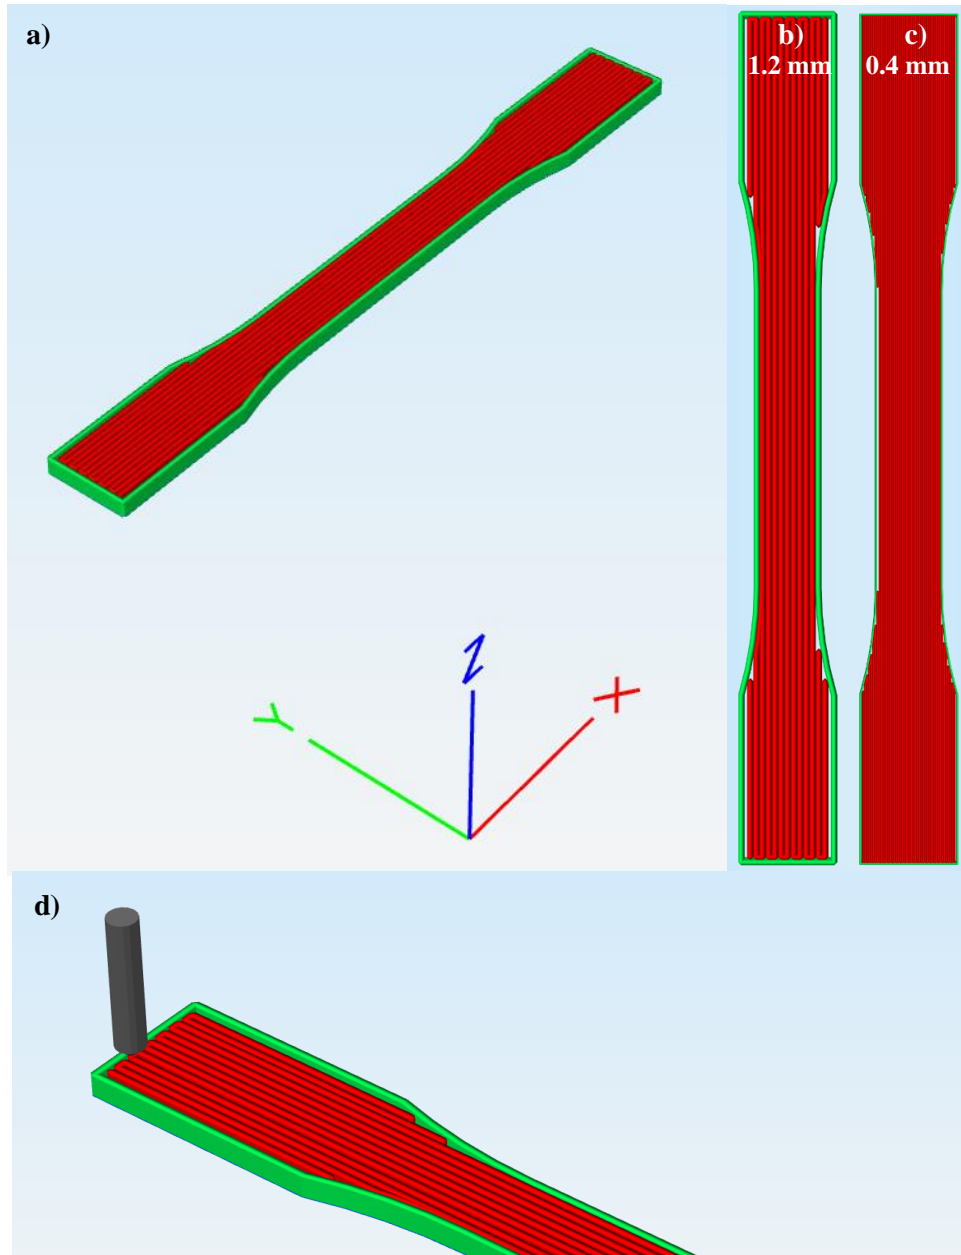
(a) isometric view; (b) 1.2 mm bead width; (c) 0.4 mm bead width; and (d) closeup.
